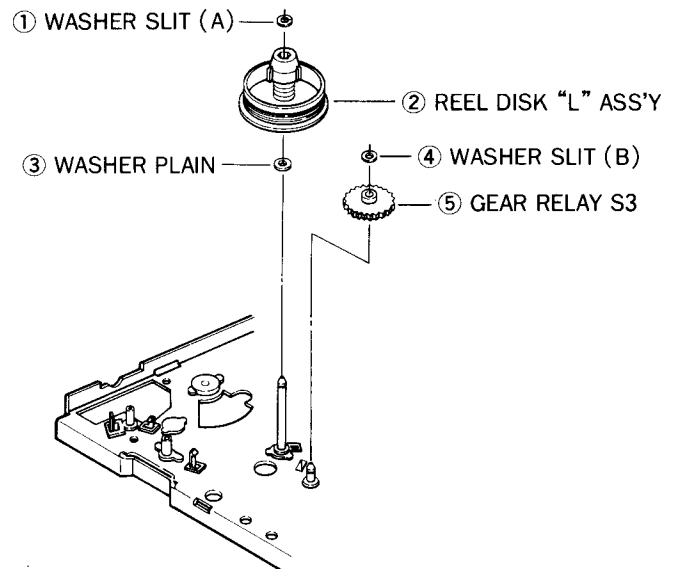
Reel Disk "L" Ass'y & Gear Relay S3 Removal
